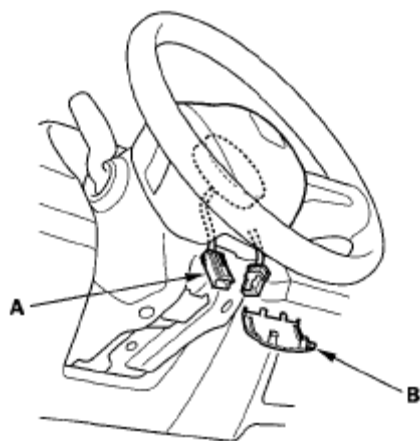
Identifying Cable Reel 4P Connector And Access Panel
